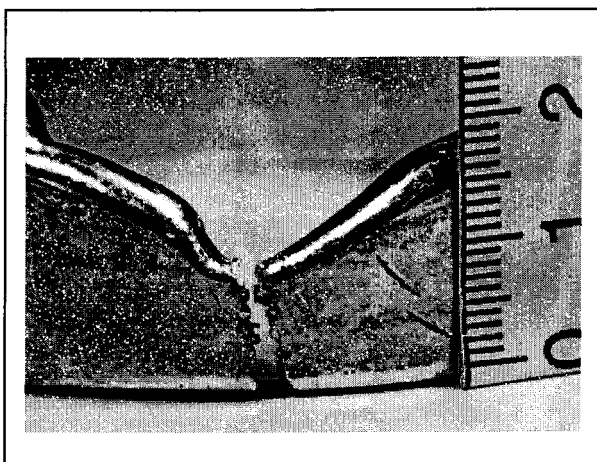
The Hot-Tearing Fracture of the Test Rings for AA1050.
